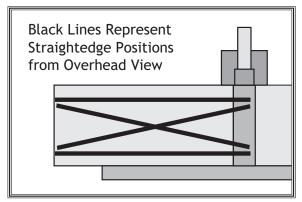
Straightedge positions for verifying if outfeed table is parallel with cutterhead.
